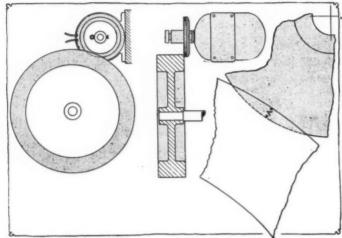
A—Holtzer-Cabot system, showing front and side views of generator at left and enlarged view of driving pulley at right
